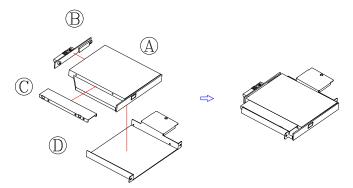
SLIM CD-ROM ASSEMBLY
